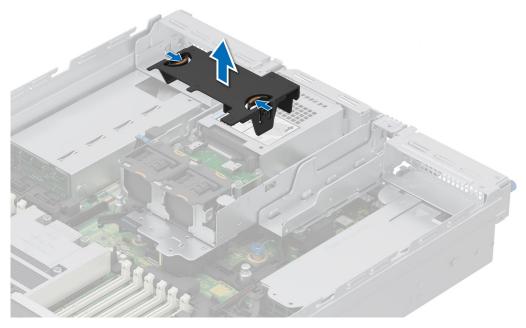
Removing the 2 x 2.5-inch rear drive module air shroud
